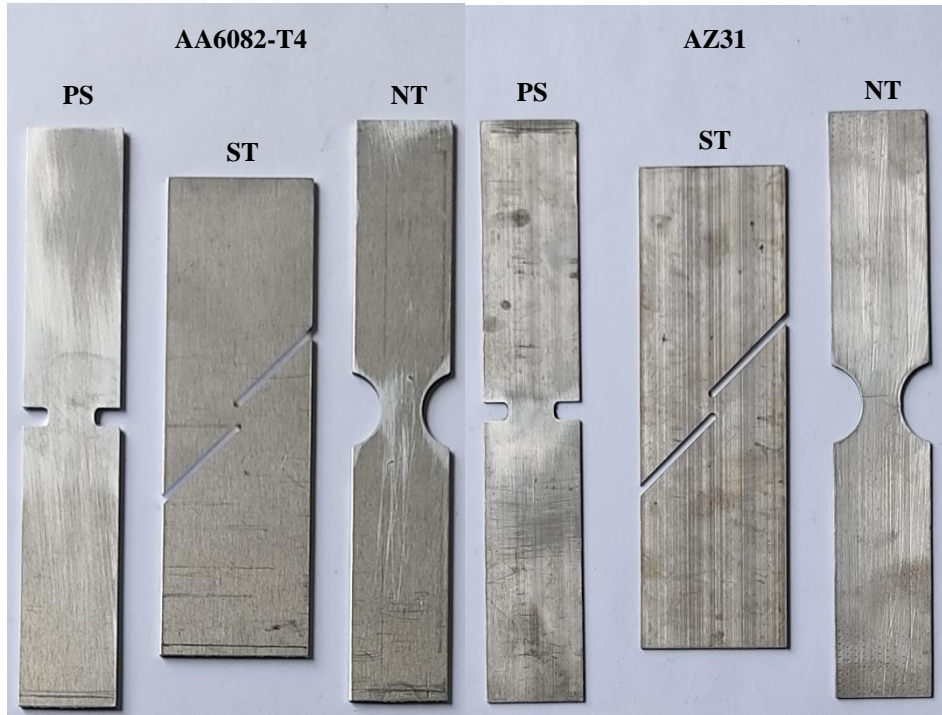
Experimental formability test specimens: PS - Plane Strain tension specimen, ST - Shear Tension specimen and NT - Notched Tension specimen.
